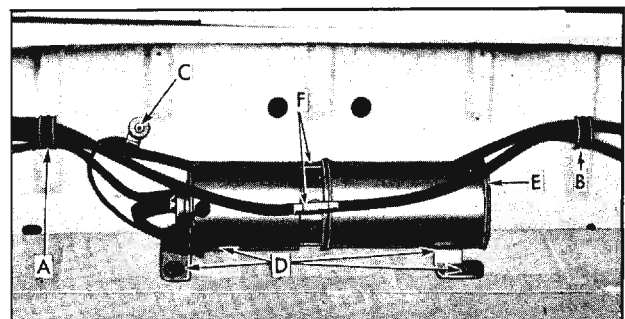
Hydro-Lectric Motor and Pump Assembly
